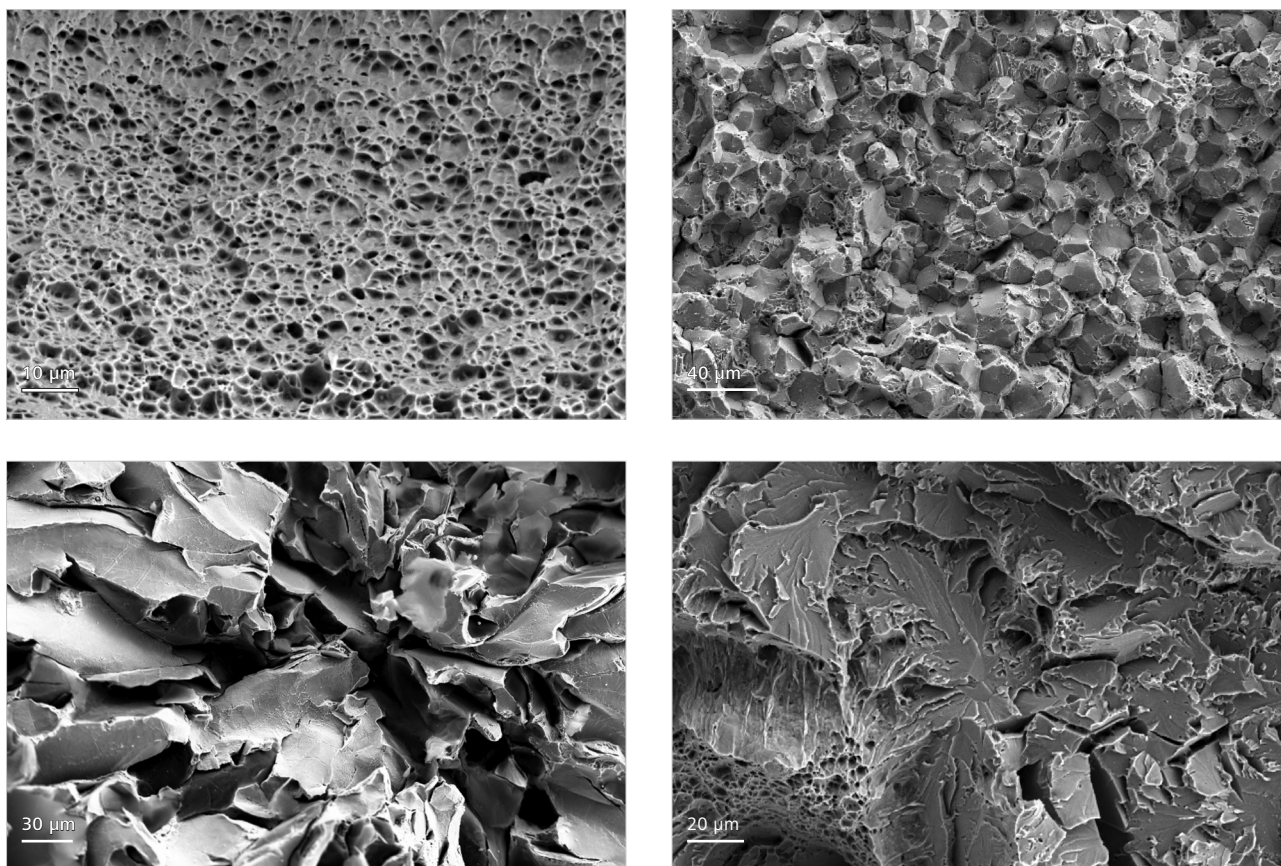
Fracture surfaces examined using ZEISS Sigma 300 with secondary electron imaging. Top left: Ductile failure during bending. Top Right: Intergranular brittle failure during bending. Bottom left: Brittle failure during tension. Bottom right: Complex fracture surface showing mixed failure modes. Sample provided by The Test House, Ltd., Cambridge, U.K.
